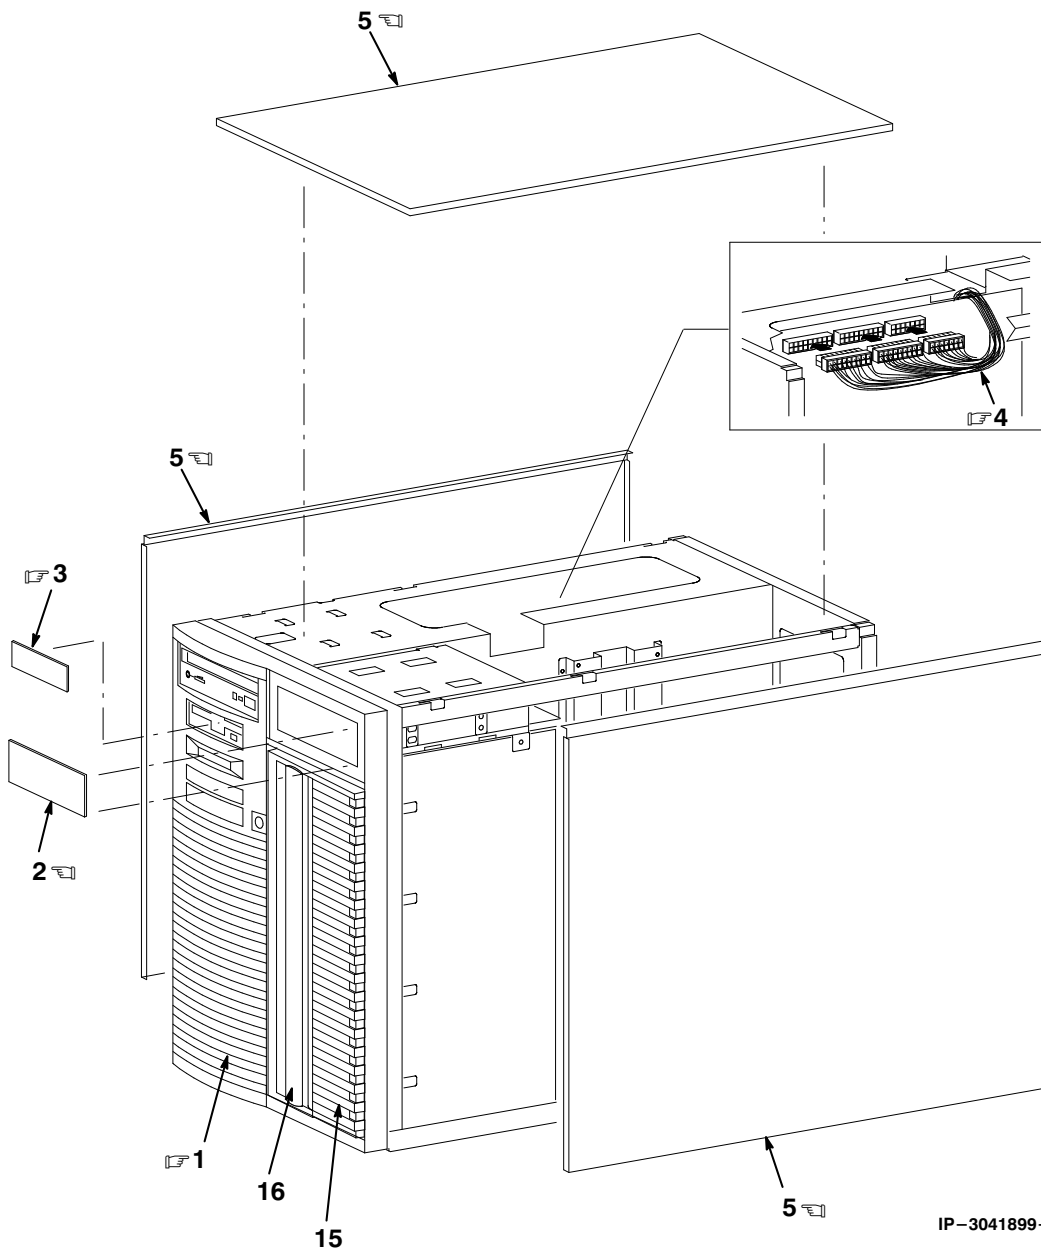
Kernel Assemblies (Sheet 3 of 3)
